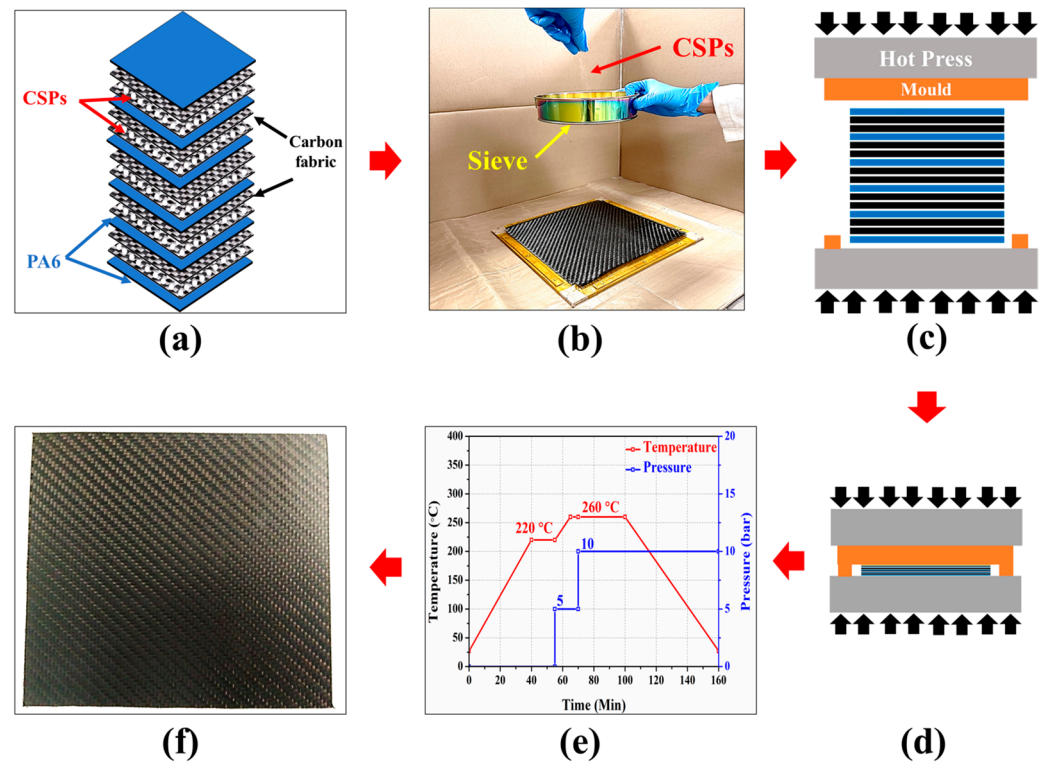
Manufacturing Process for CF/PA6 composites; (a) CSPs dispersed at the ply interfaces; (b) Manual dispersion of filler using a sieve; (c,d) Hot press compression molding; (e) Two-step consolidation cycle; (f) Manufactured composites.
